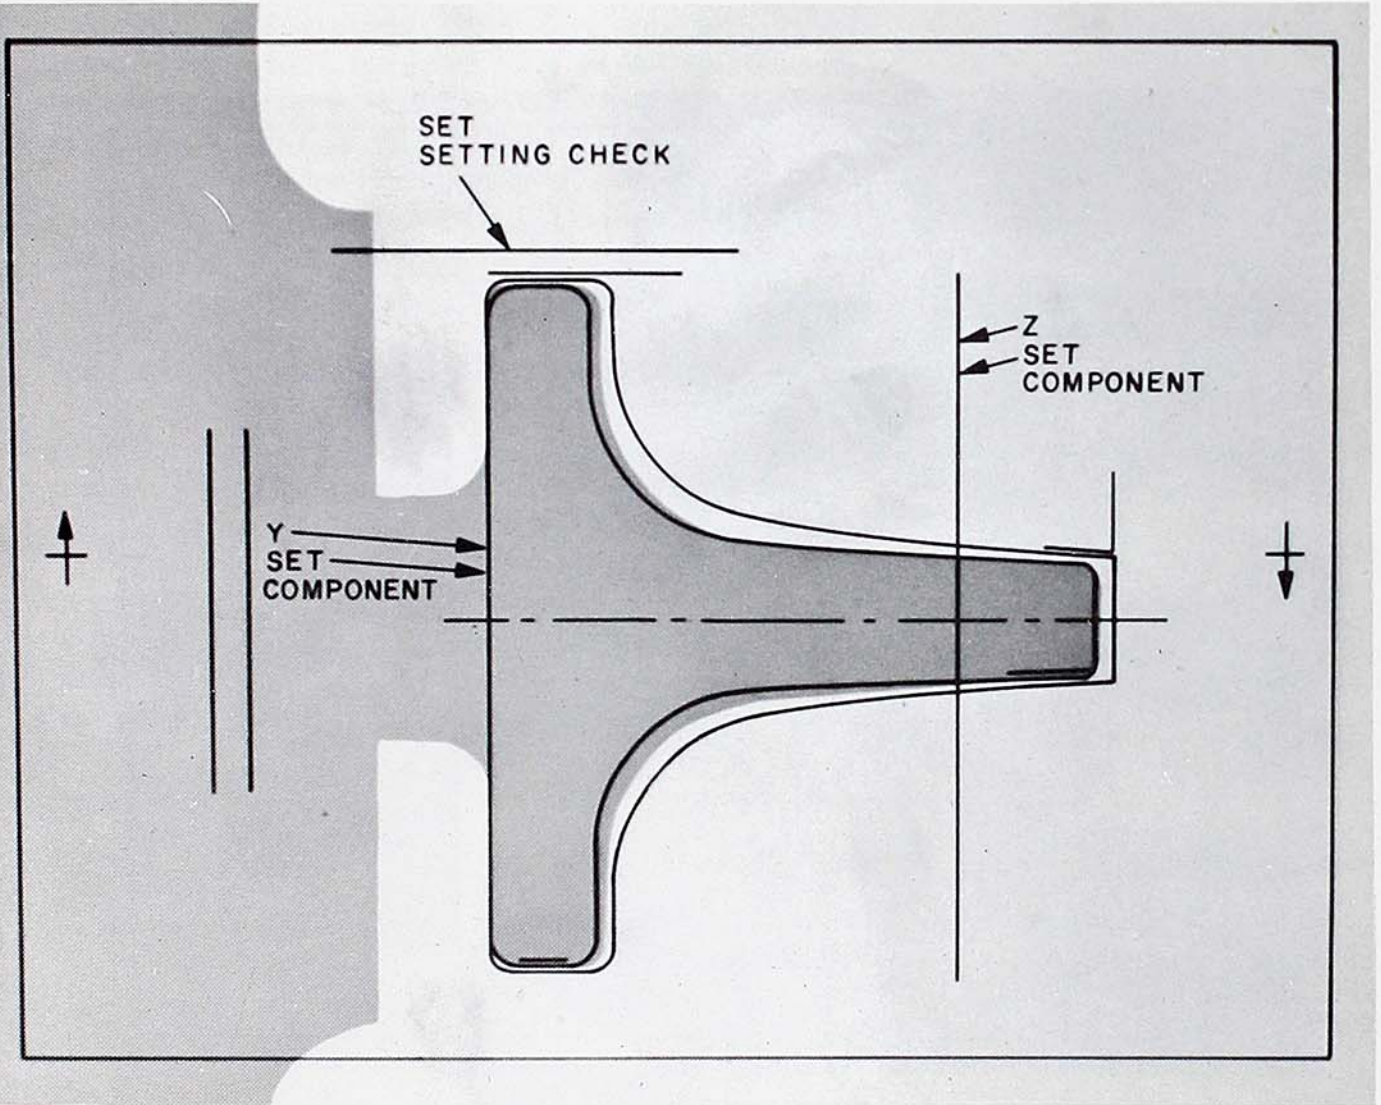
Component Setting for Checking Rim and Post End Dimensions.
